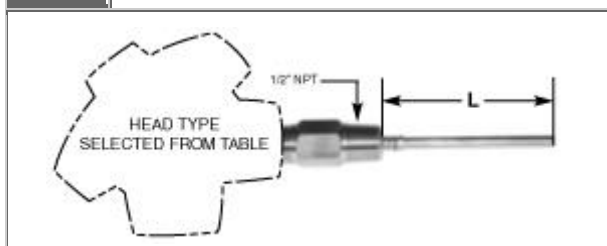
T/C Assembly w/ 1/2" NPT Spring Loaded Fitting
